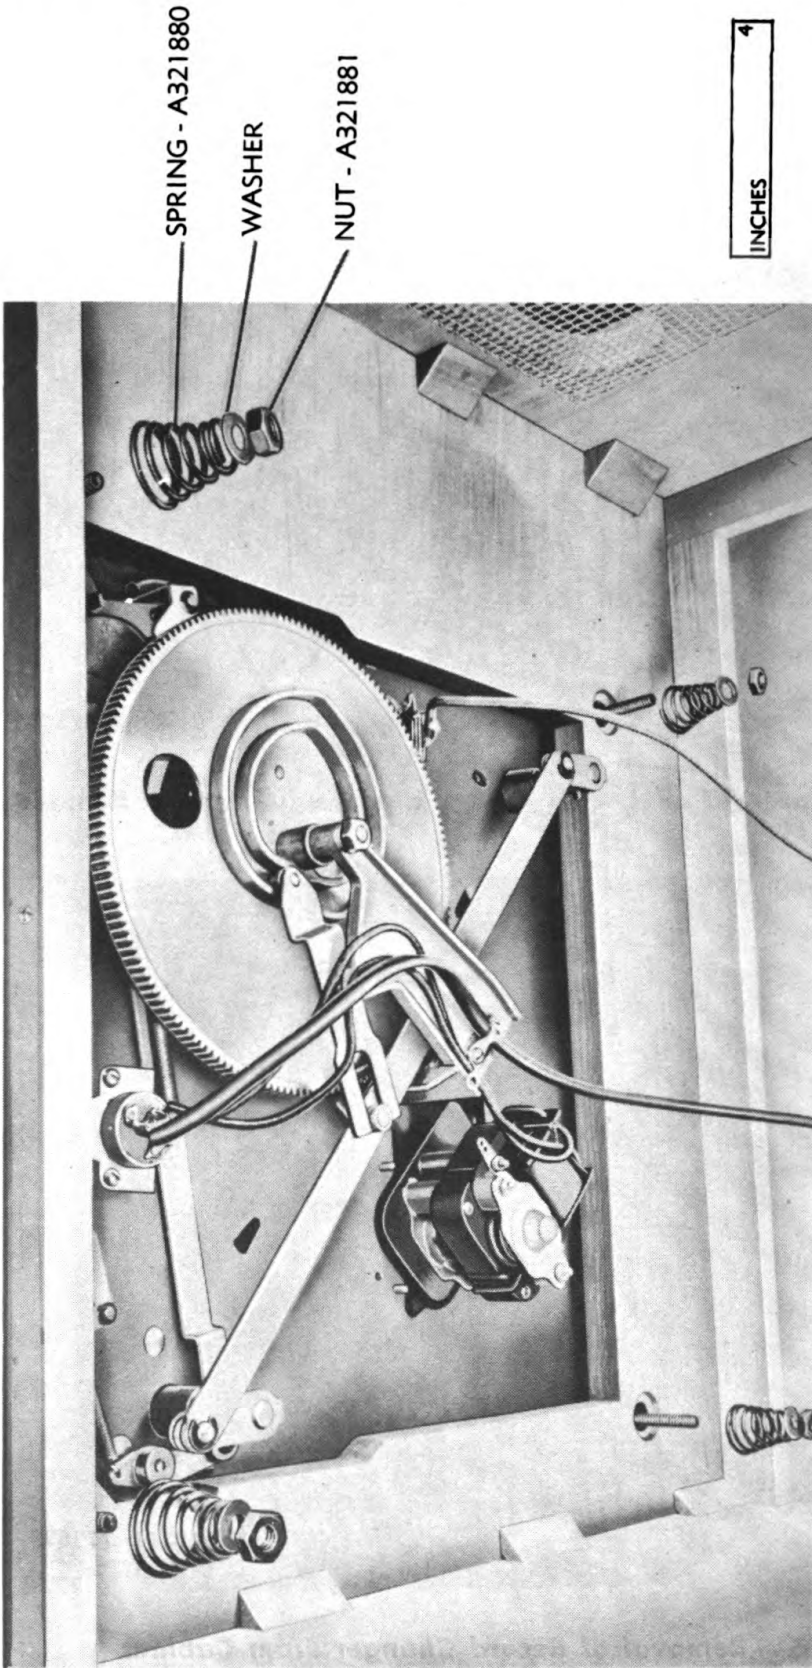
Control Panel — Timer Mounting and Grommet Removed
